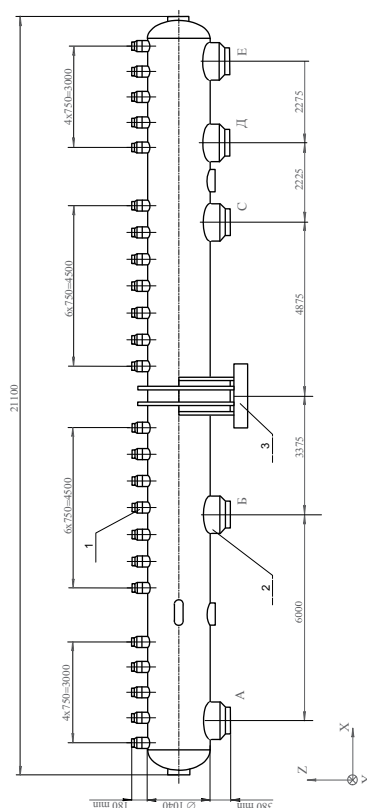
Sketch of header in-take: 1 – nozzle DN300 to joint with down-comer; 2 – nozzle DN750 to joint with pipe-lines in-take; 3 – central stopper
